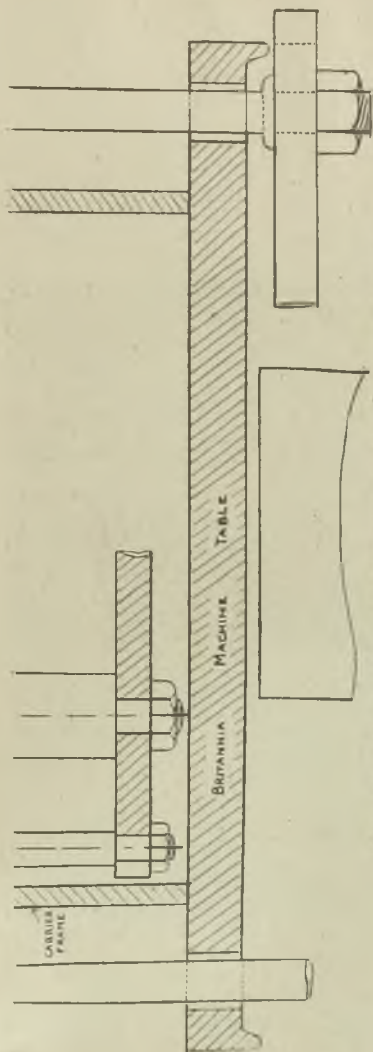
MOULDING AN OIL-COOLED MOTOR-CYCLE CYLINDER.
